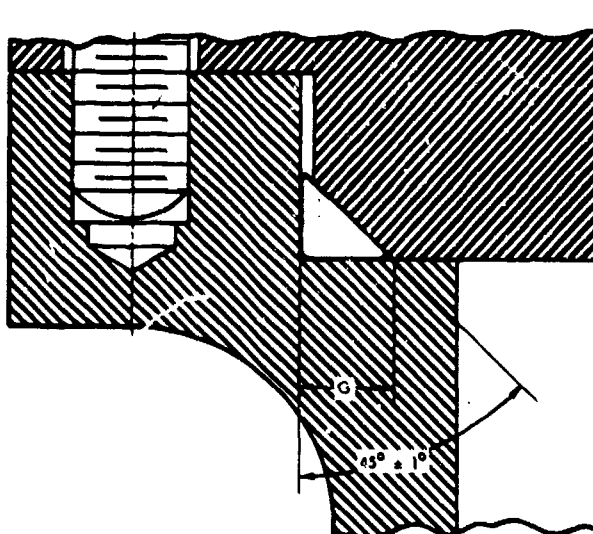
c. Loss of Seal Due to Excessive Clearance
